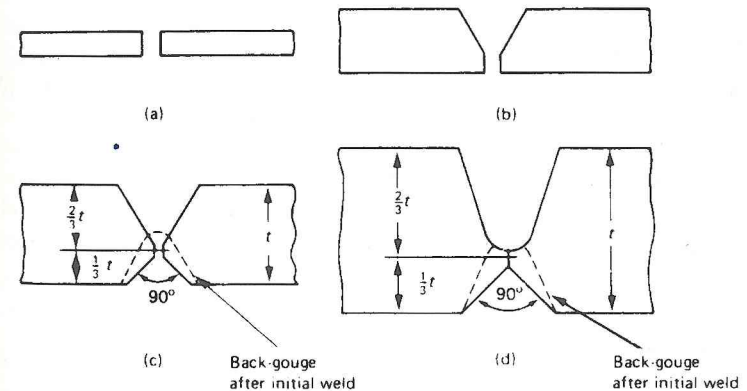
Butt weld preparations: (a) square butt joint; (b) single-V butt joint; (c) double-V butt joint; (d) double-U butt joint
